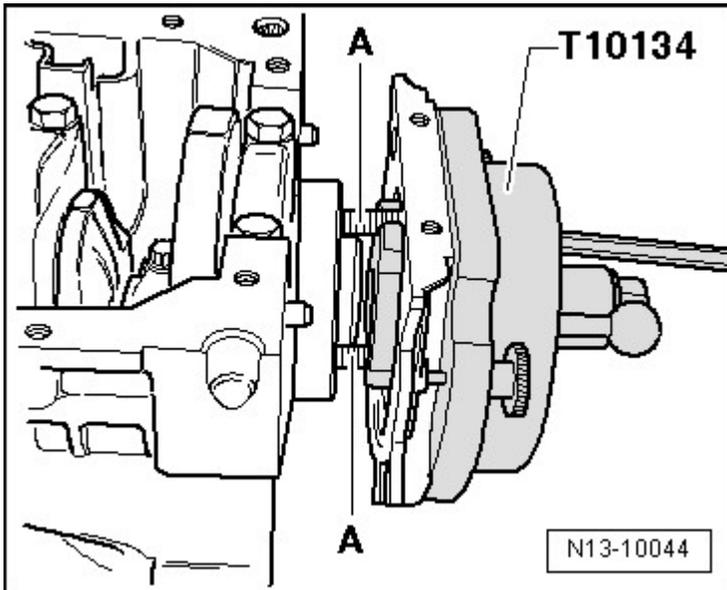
Identifying Assembly Tool T10134 Secured Onto Crankshaft Flange Using Socket Head Hex Bolts
